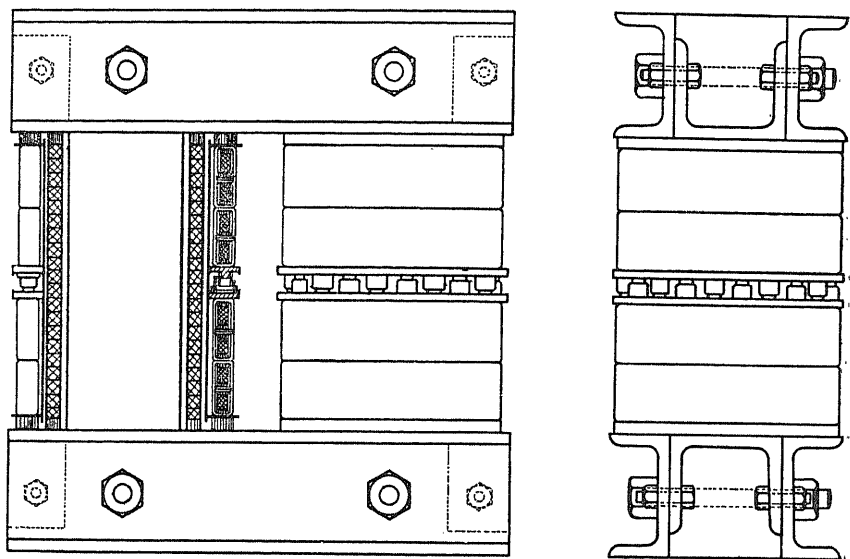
Spring Coil Supports for automatically taking up Shrinkage of Windings (Ferranti, Ltd.)
